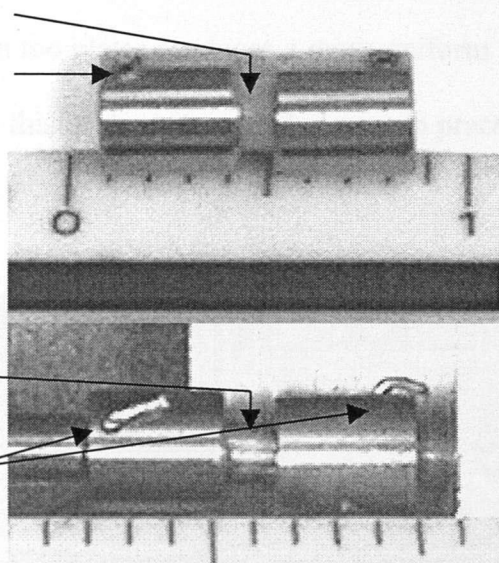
Original universal coupling (top). Modified universal coupling (bottom).
